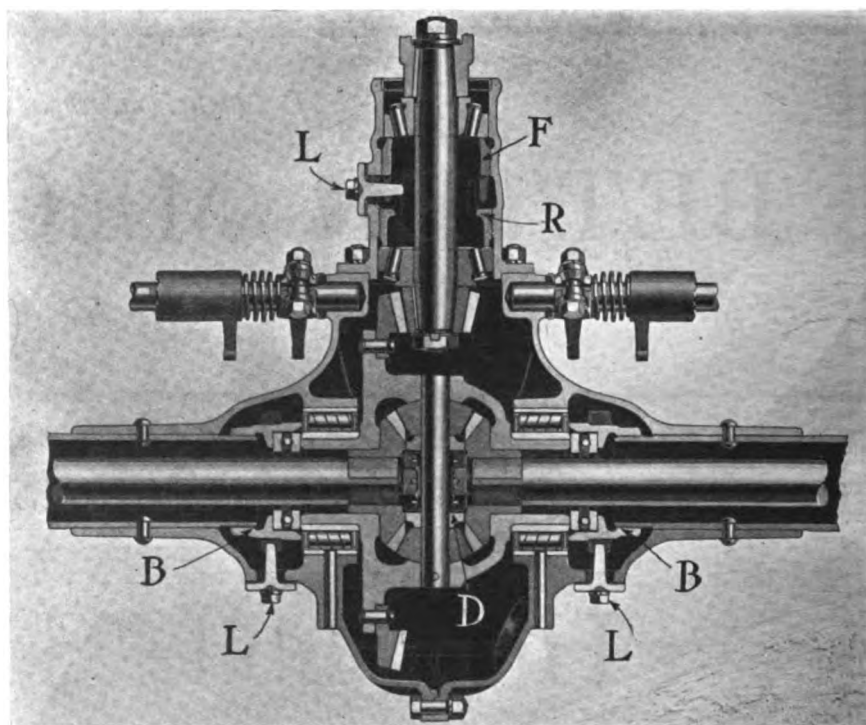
Section through differential indicating adjustments for the bevel gear bearings and the differential pinion bearings
